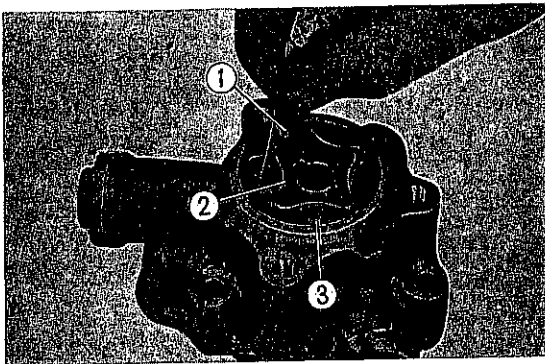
① Feeler gauge ② Inner rotor ③ Outer rotor
